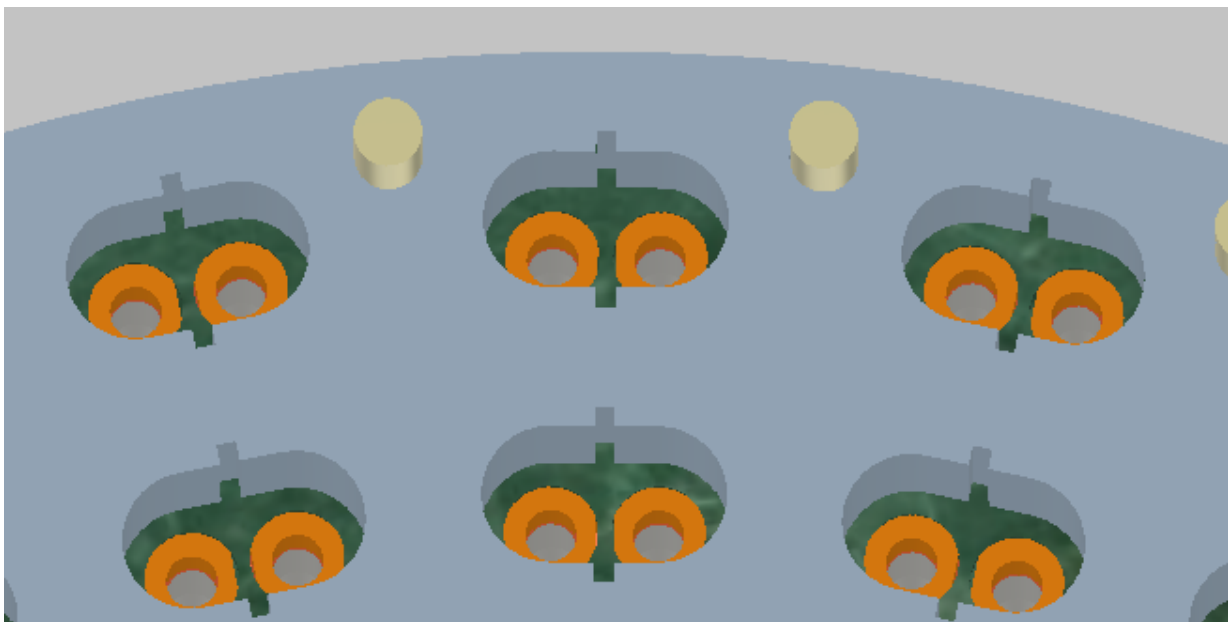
Stator openings in stator drum, in order to insulate the screw heads from the stator drum and neighbouring screw heads. Machine dimensions as described in Appendix B.
